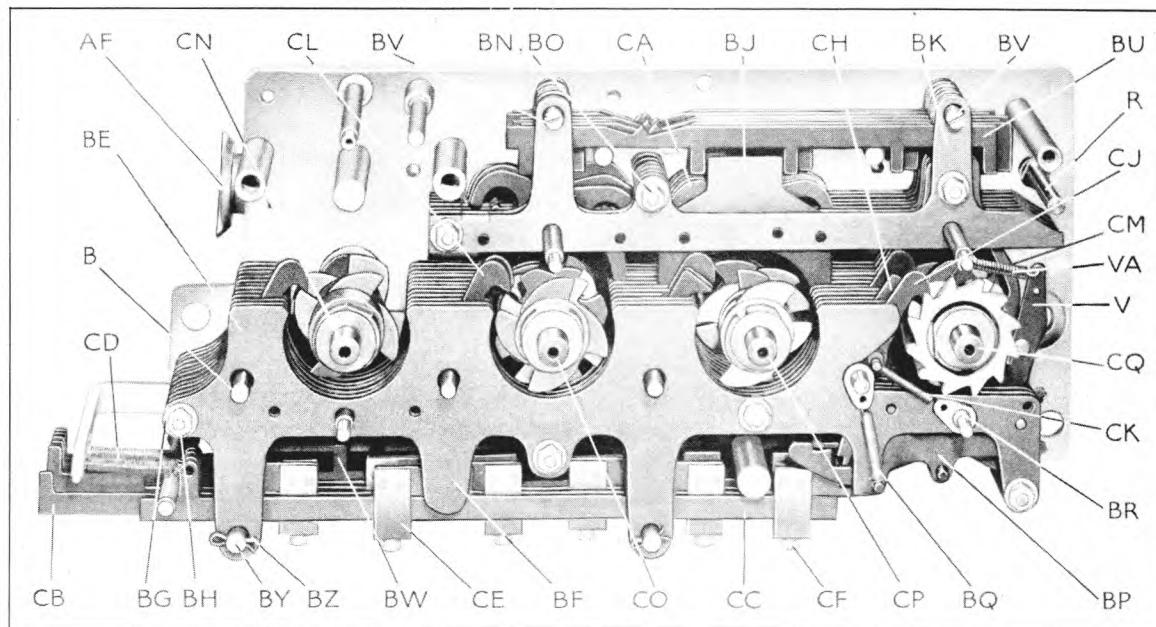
TRANSFER UNIT PARTIAL ASSEMBLY (For C.T. Keyboards)
